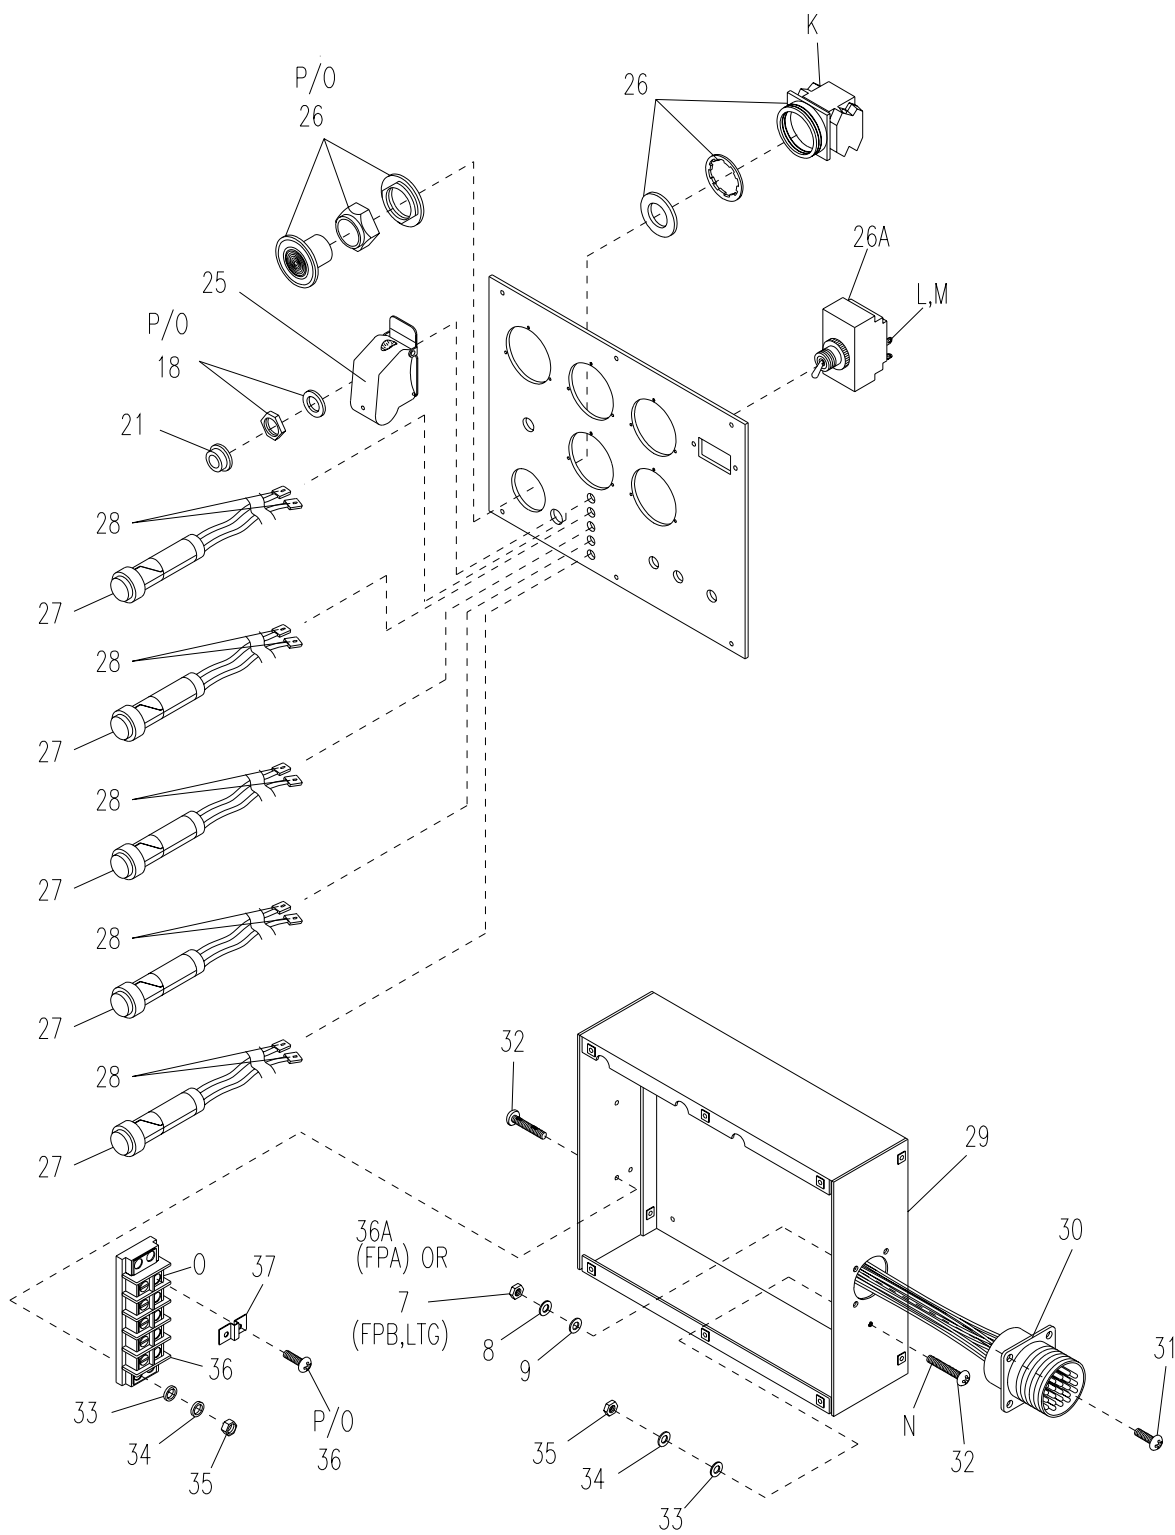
APU Control Box Assembly (Sheet 2 of 3)
